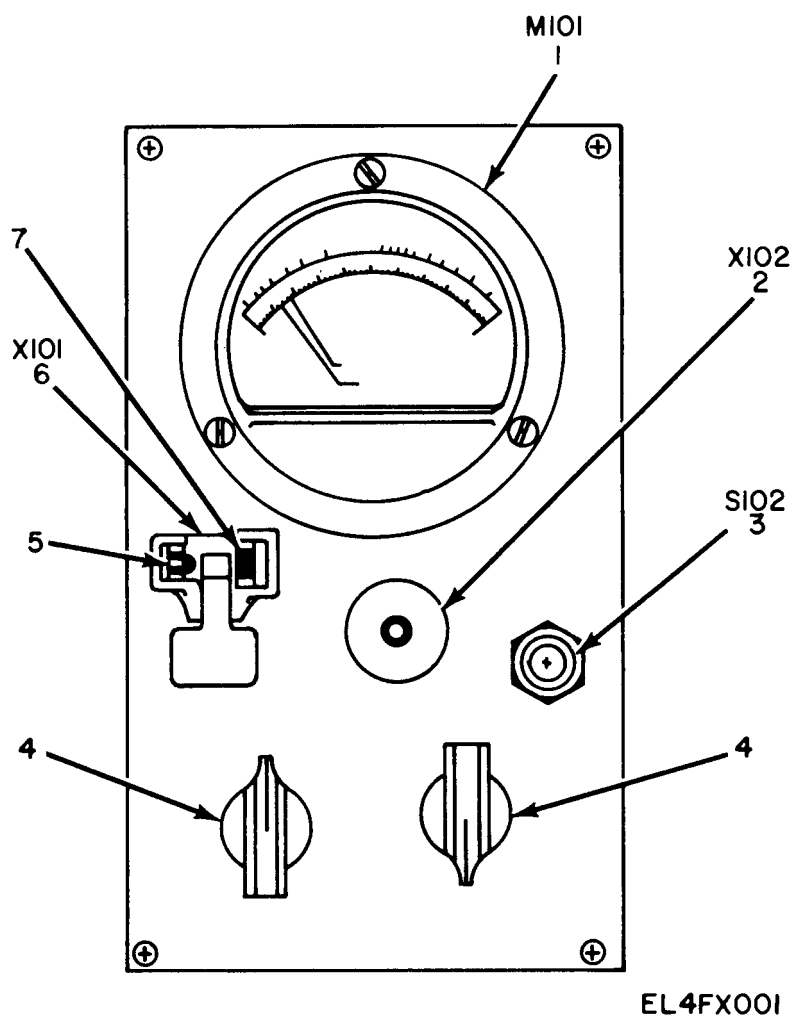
Crystal Rectifier Test Set TS-268E/U, Panel Assembly, Front View.
